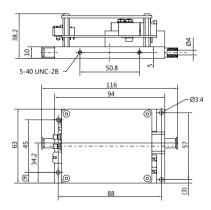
Outline drawing of DP-SP series driver with general purpose pad
